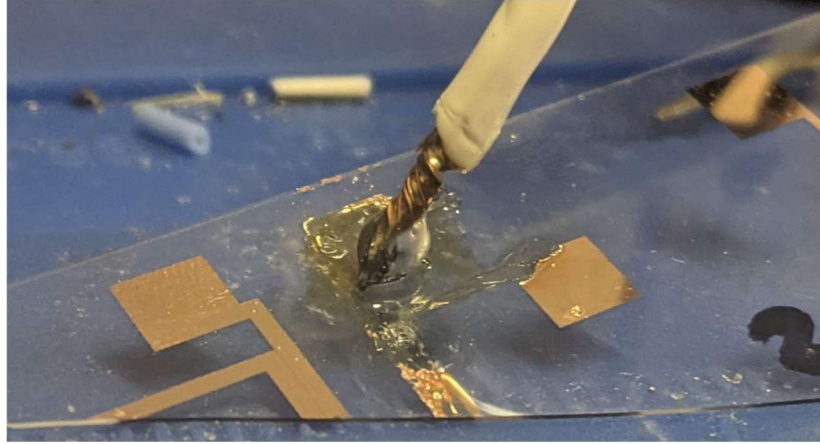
Sample 2S after the attachment of the 16 gauge copper wire using cuprate solder. The melting of the top copper layer is clearly visible in this image, as is the distinct beaded structure of the solder
